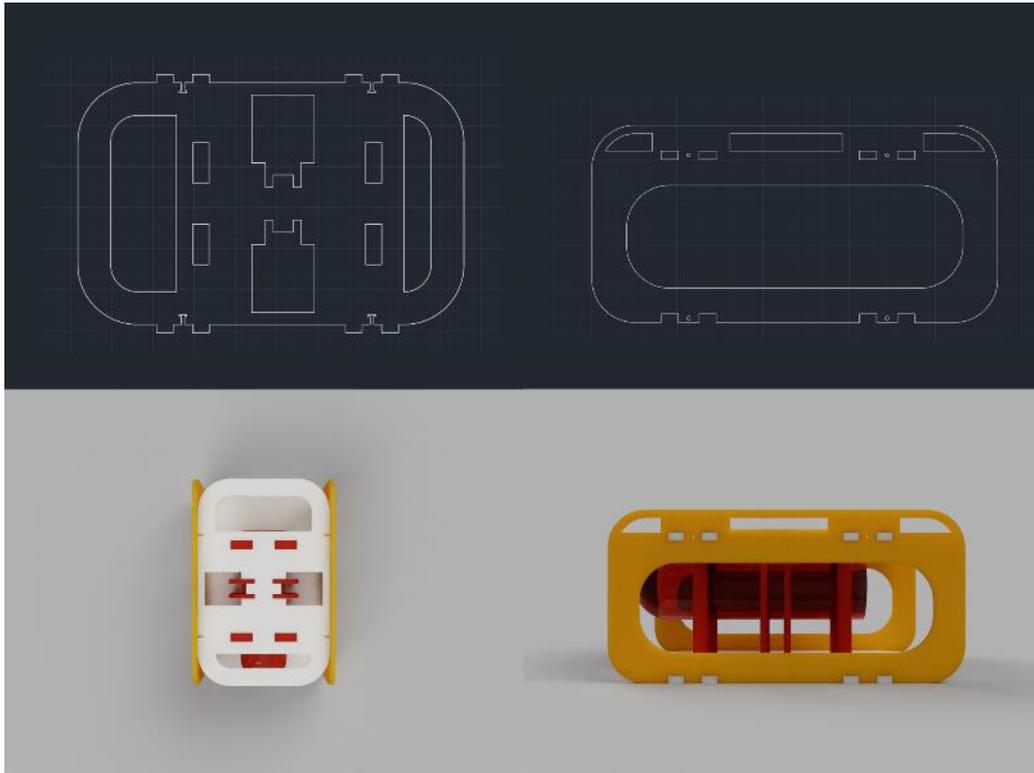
CAD design and 3D model for side(right) and upper board(left)
